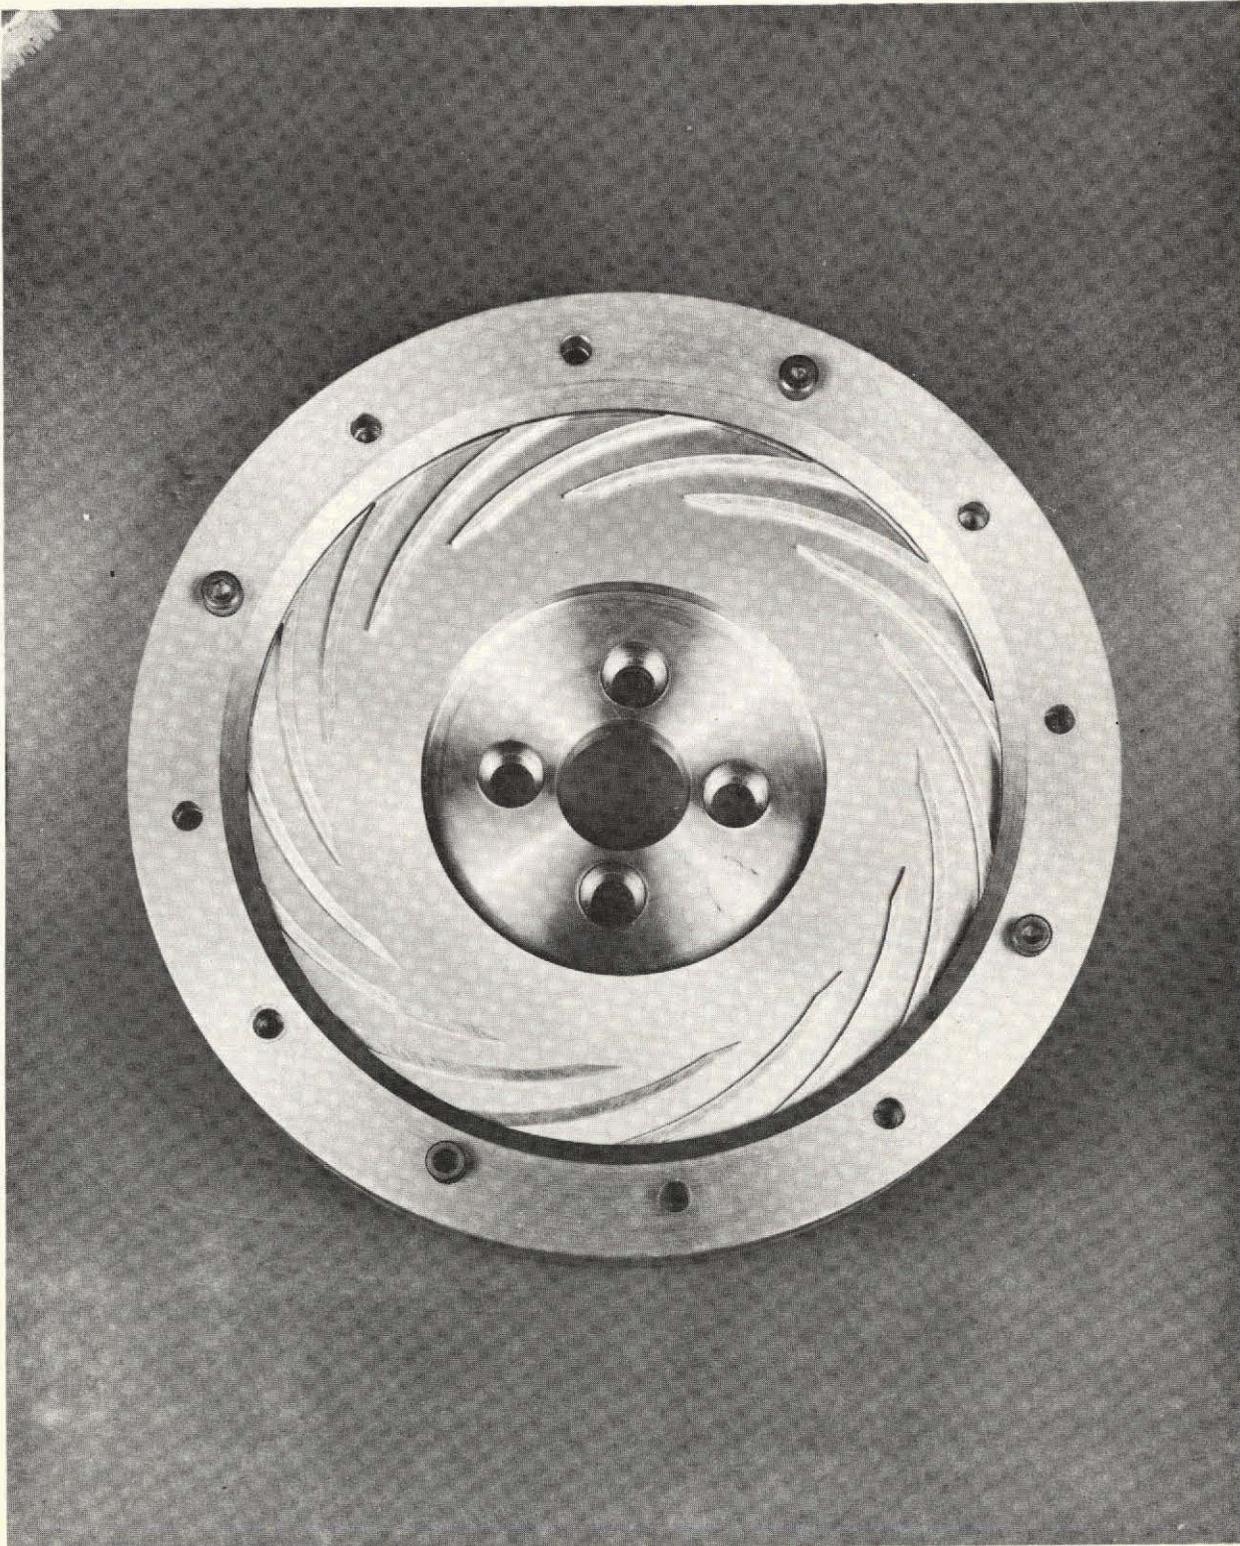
Spray Mask and Holding Fixture, in Position on Thrust Bearing, Ready for Coating
